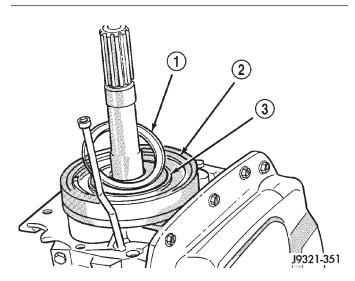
Overdrive Piston Thrust Bearing Removal/ Installation
